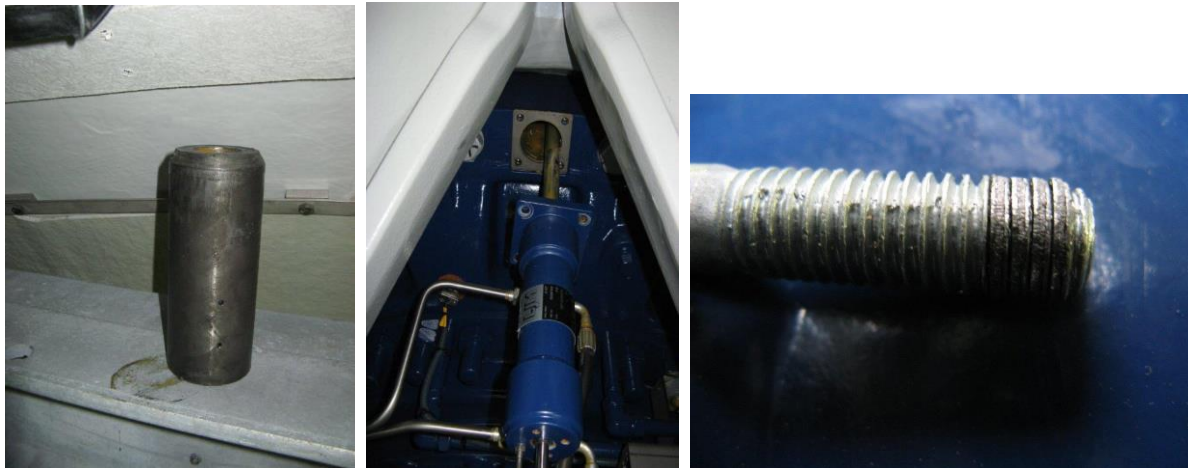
Left: locking pin; middle: pump driving locking pin; right: bolt that came loose
